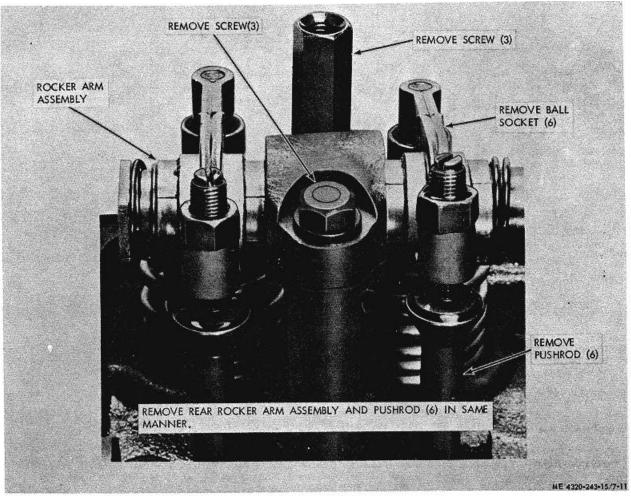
Rocker arm assembly and push rods, removal and installation
